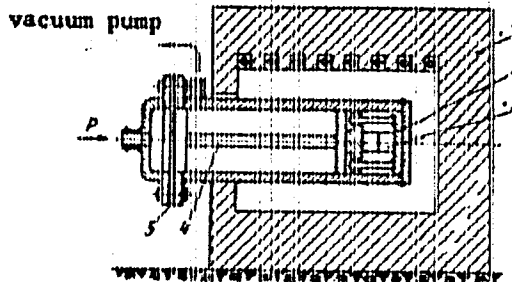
Diagram of diffusion welding in box furnace
